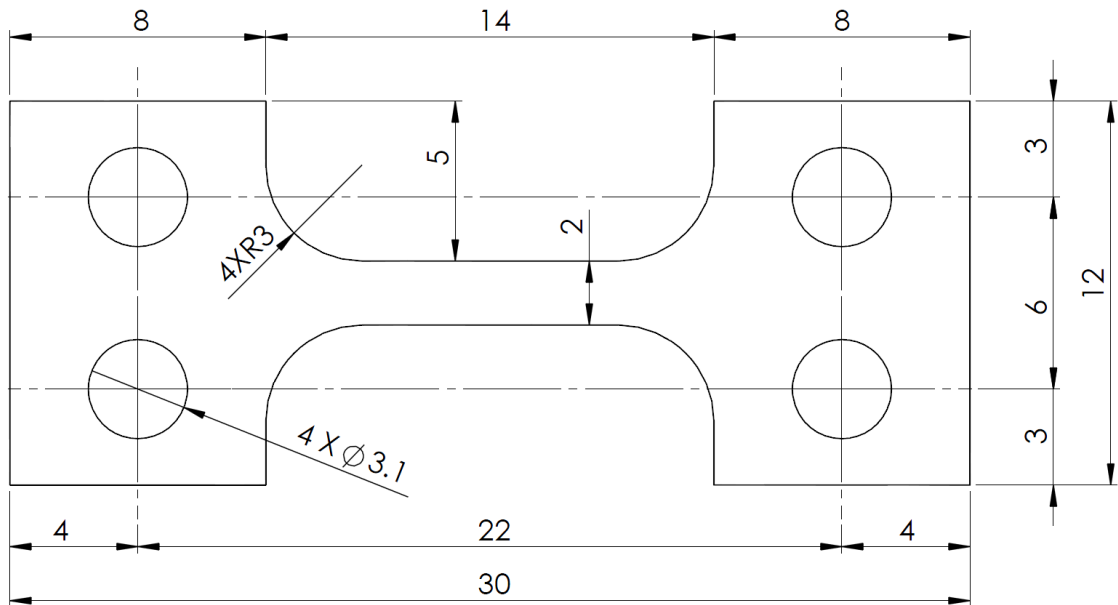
Microtensile specimen dimensions in millimetres. The specimen has a curvature due to the tube of approximately 15.7 mm and requires special gripping arrangements to test.
